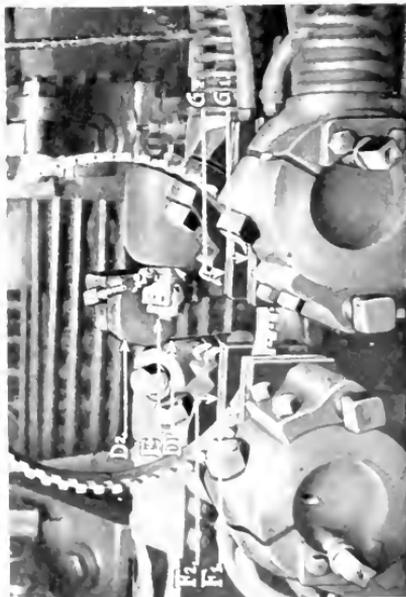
Electric Welding Machine Arranged for Butt Welding Rotor End Ring. When arranged in this way, this machine can be used for a great variety of butt welding operations.
